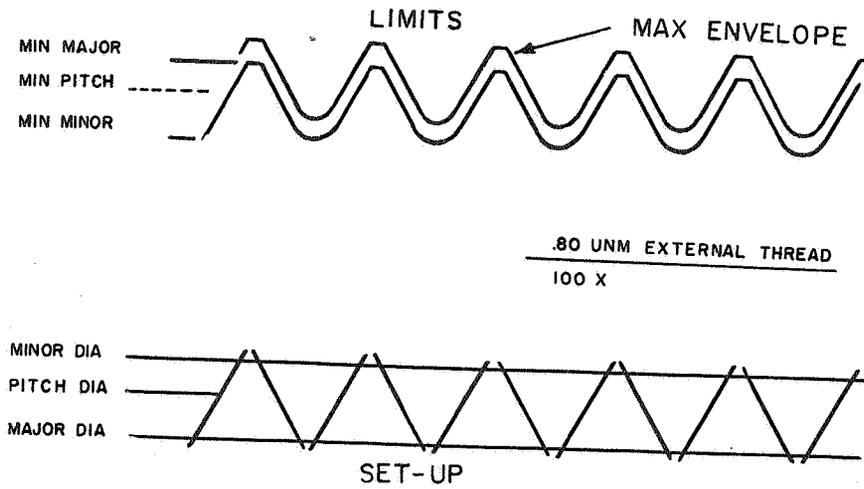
Suggested chart for projection inspection of external Unified Miniature threads, UNM.
